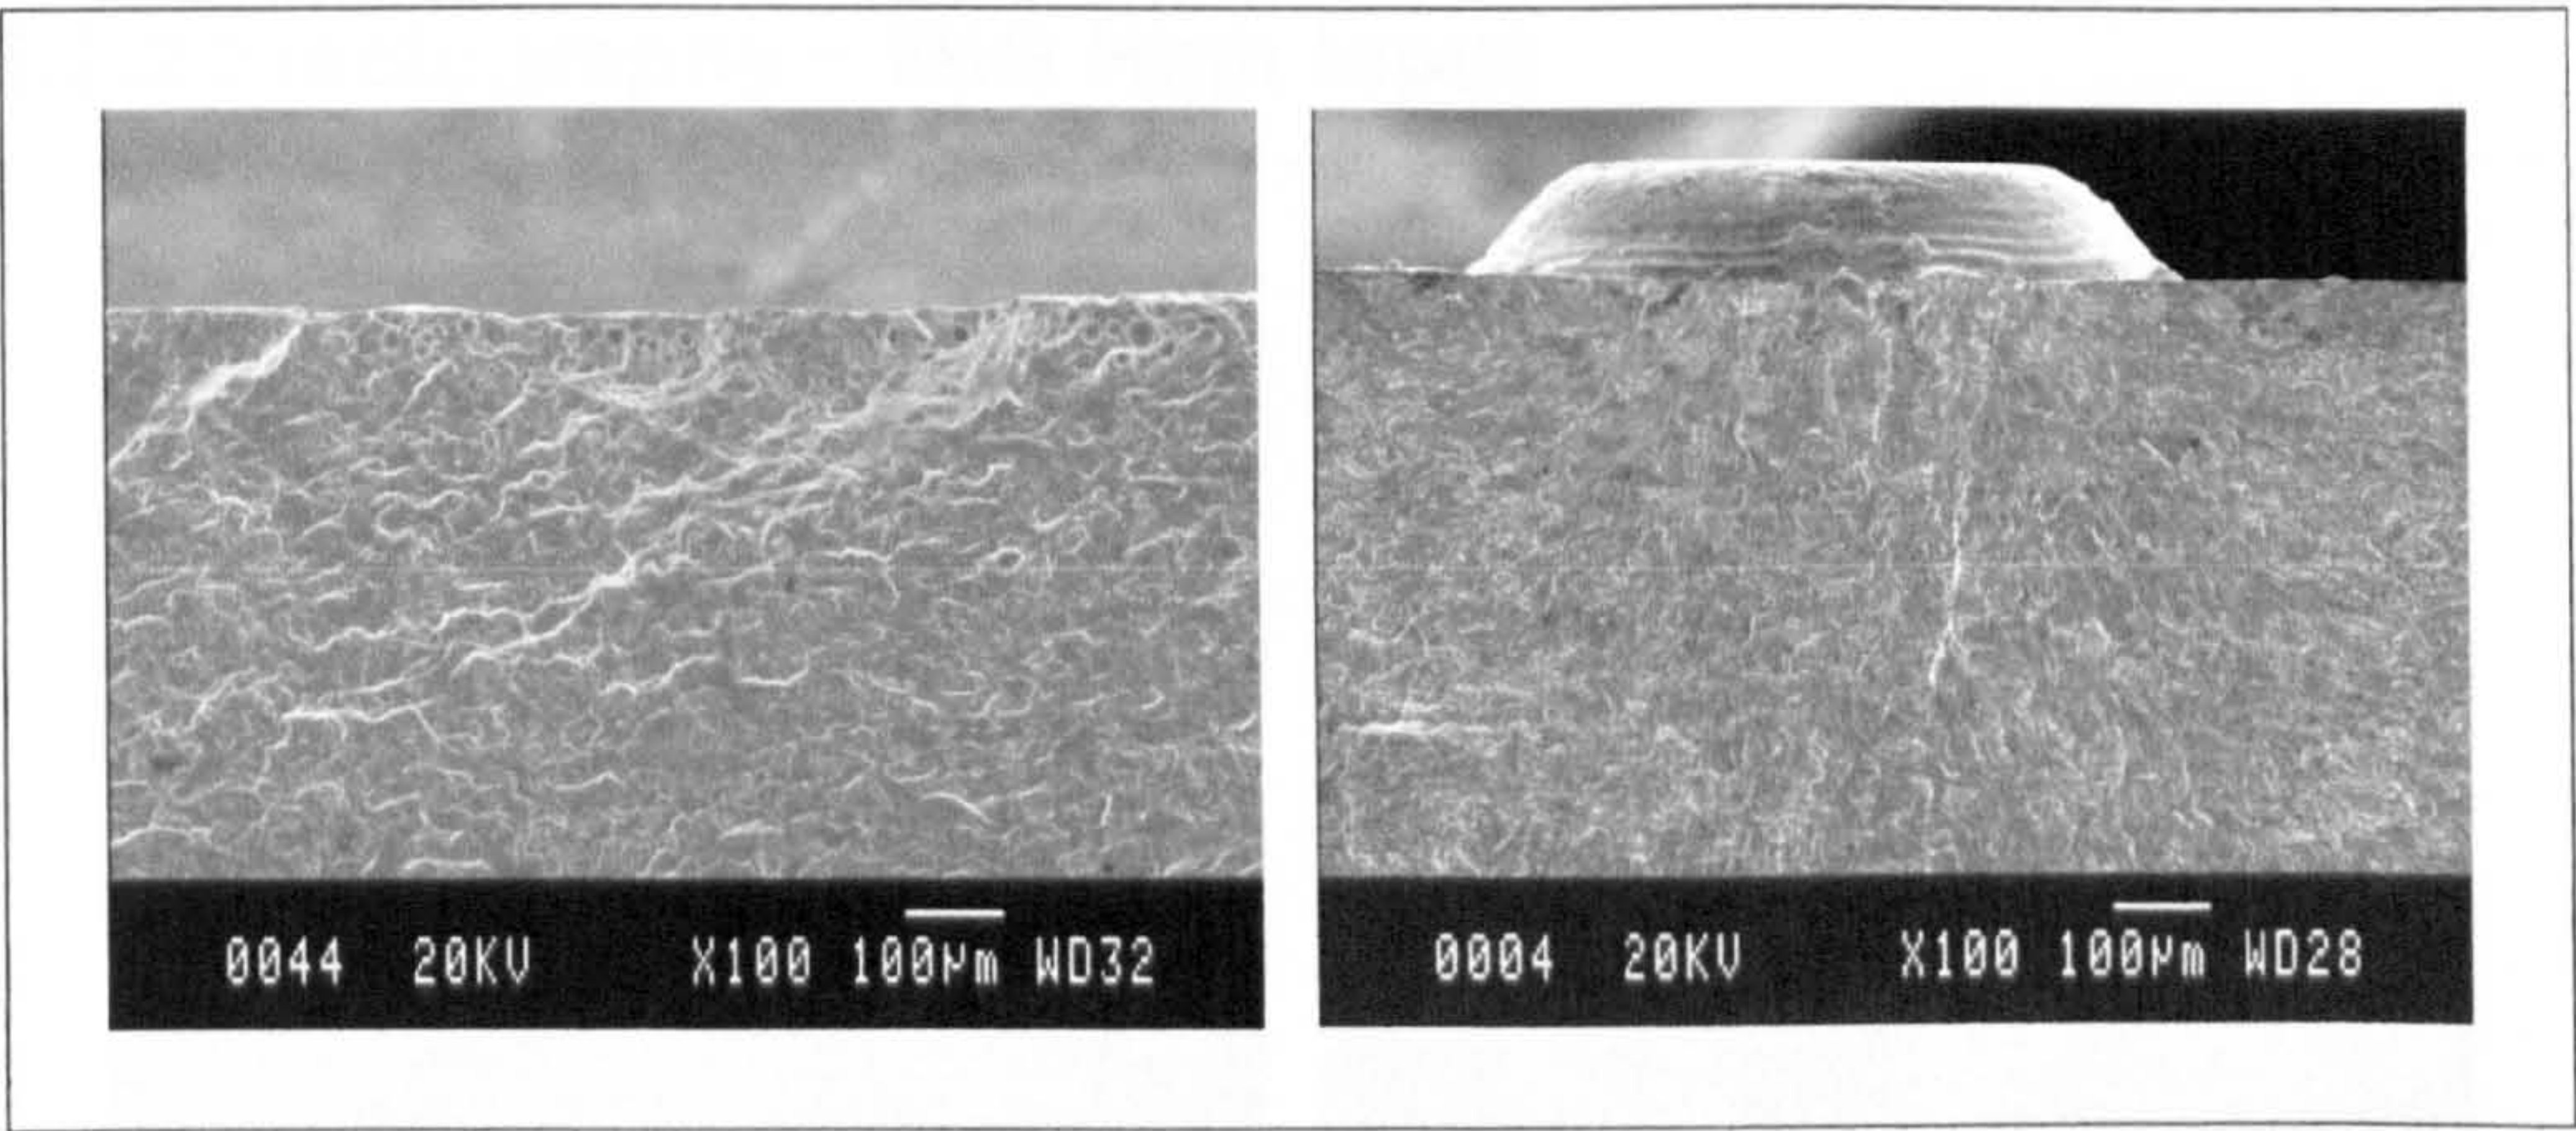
Crack initiation and coalescence due to line of pores (left) (MIG LI 4), initiation due to weld spatter (right) (MIG LI 7).
